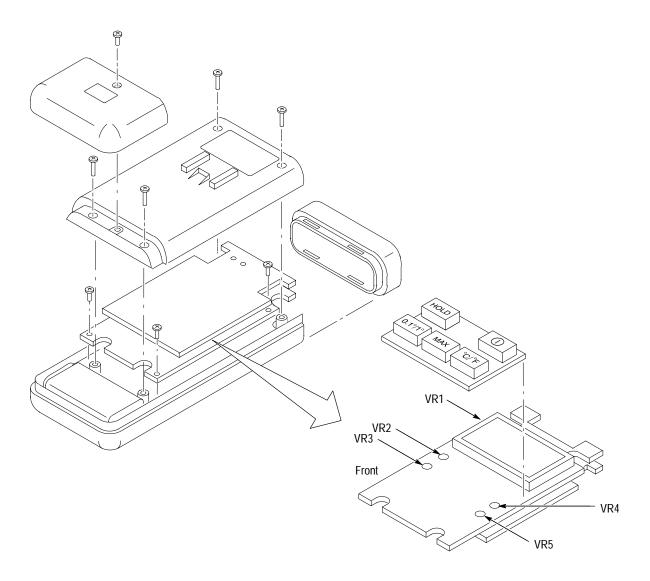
DTM900 Thermometer disassembly and adjustment locations
